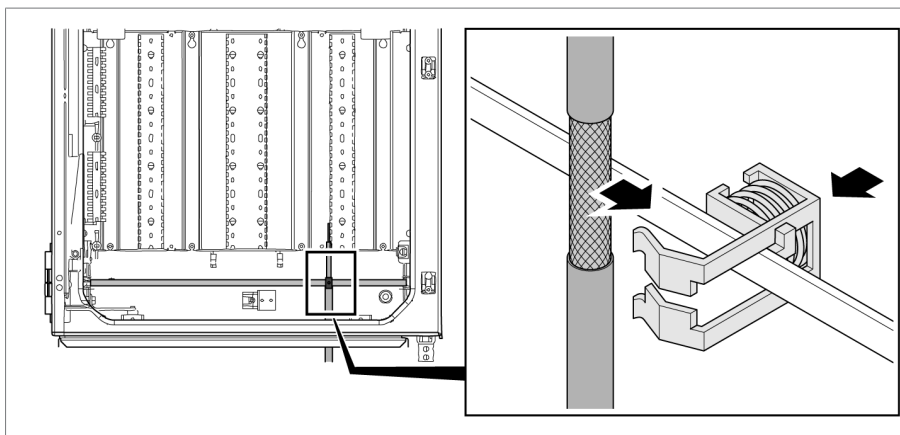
Placing the cable shield with clamping bracket on the earthing bar
